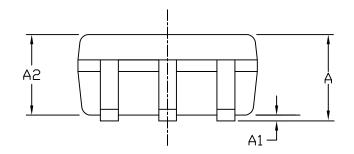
Package Drawing Hana - AYT (Thailand) 6-lead SC-70
